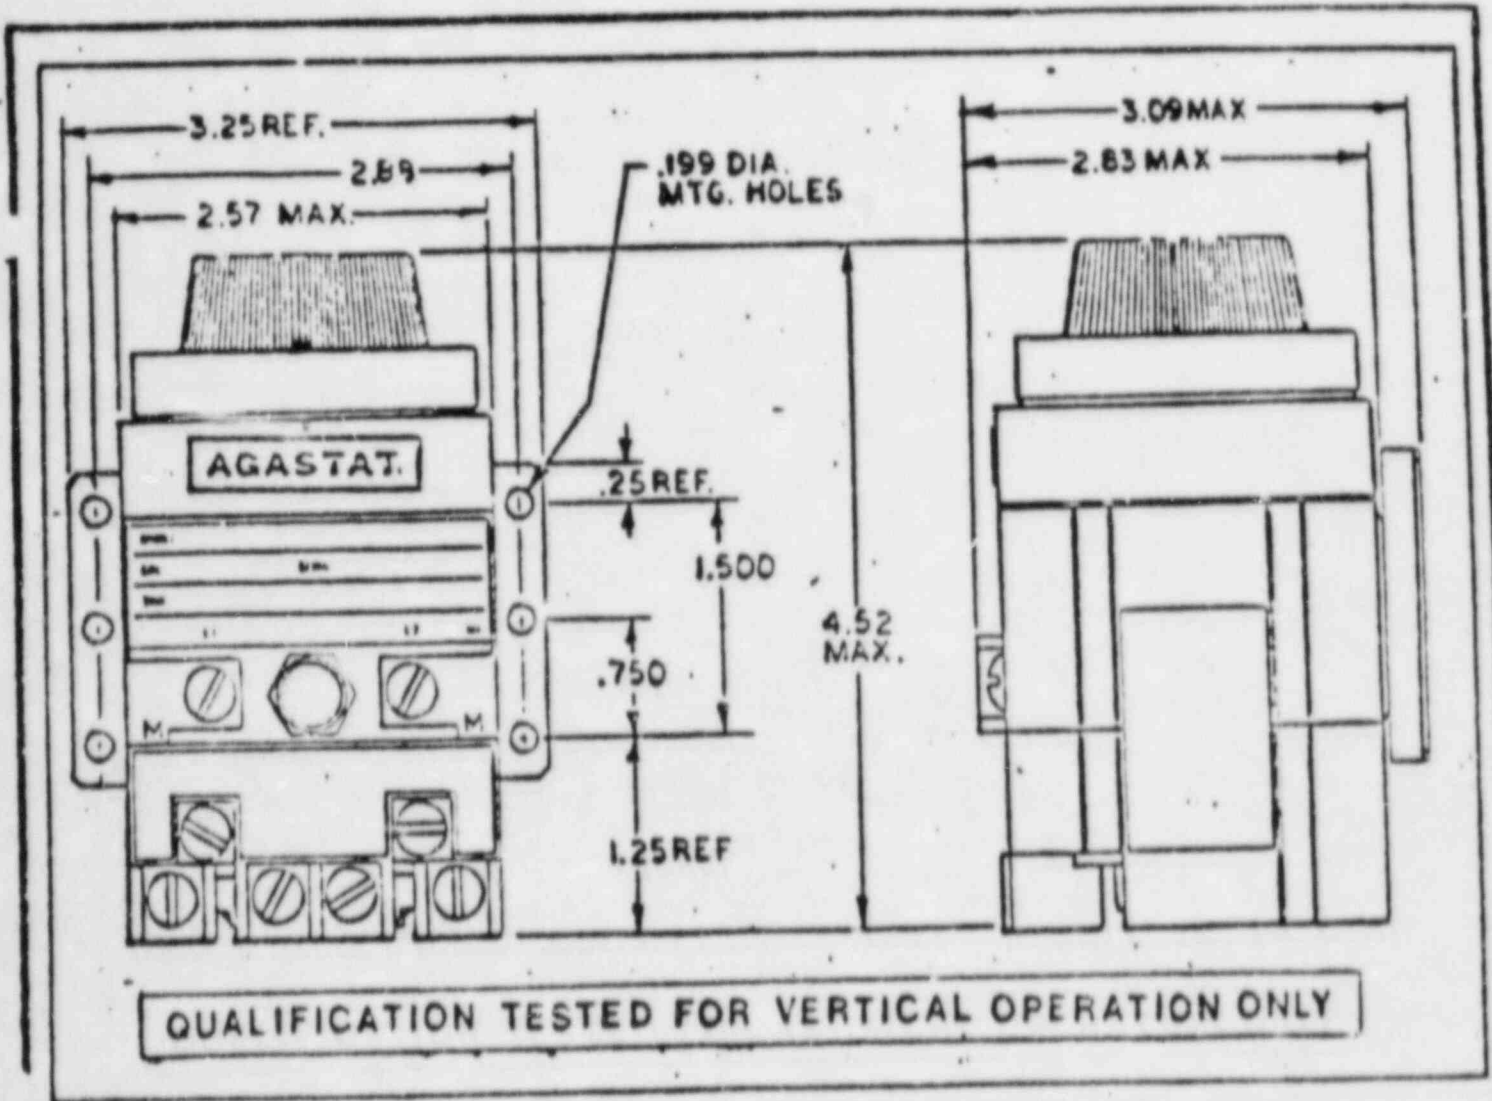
Model E7012 and E7022 Outline and Dimension Drawing.
